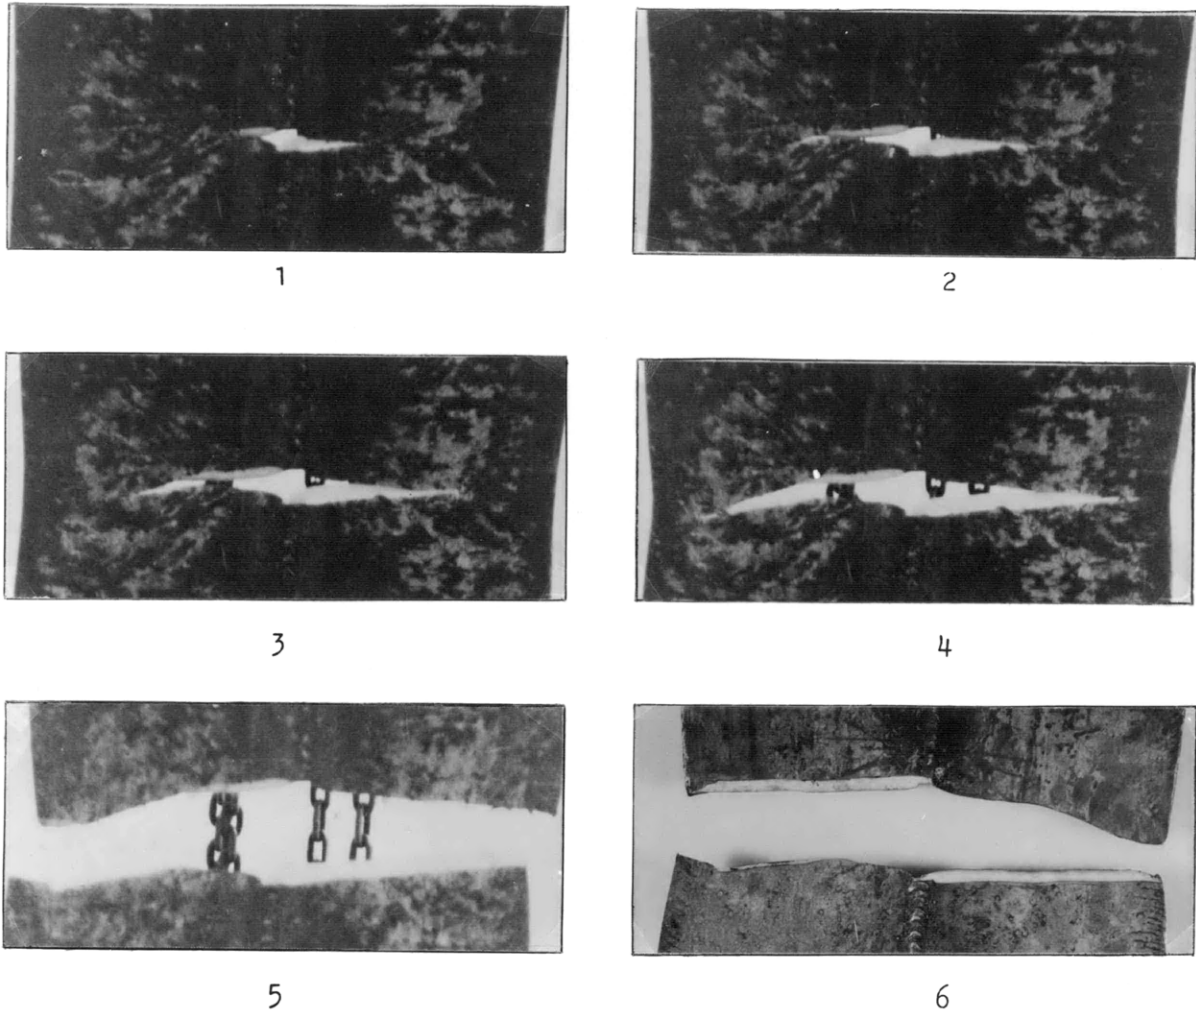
Progressive Views of Failure of Medium Steel Specimen A-M
